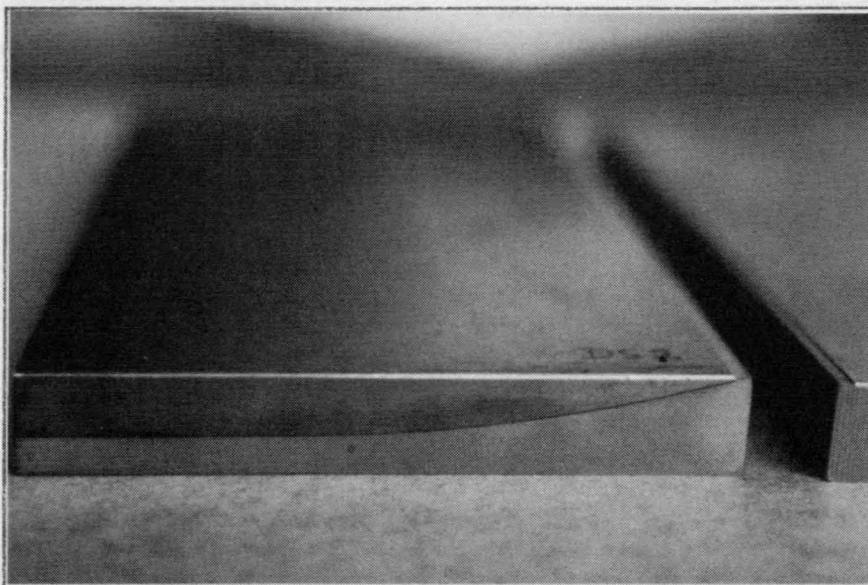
Samples DS2A&B replaced together after E.D.M. wire cutting
